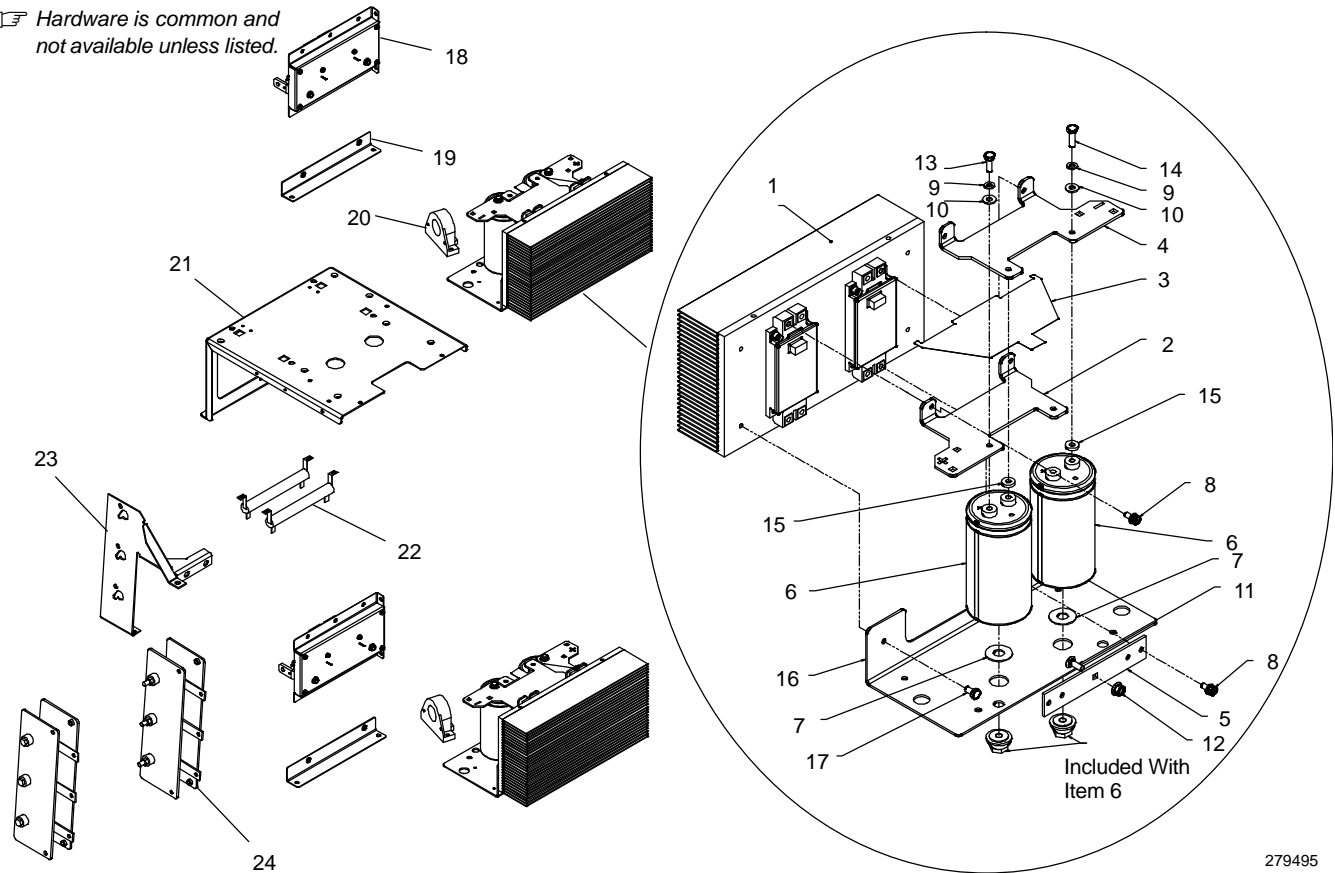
Weld Output Module, 600 Models (Figure 1-1, Item 7)
